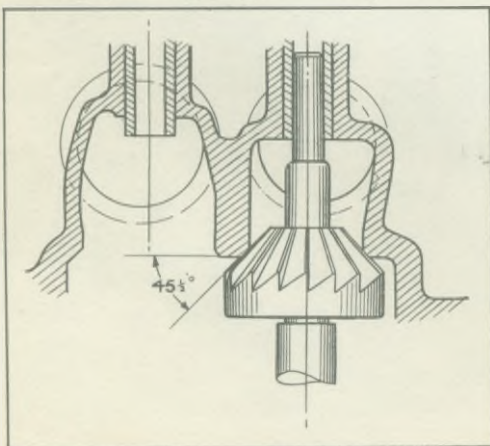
Recutting valve seating with $44\frac{1}{2}^\circ$ cutter
